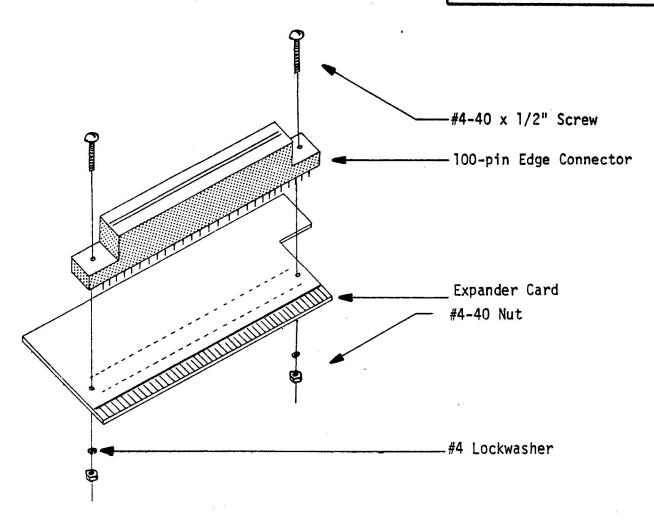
Installation of 100-pin Edge Commector onto Expander Card
